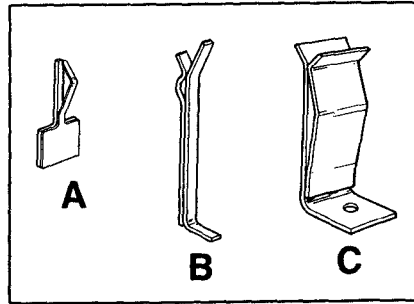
Push on type racks load "one-handed". (A) For inside racking. (B) For outside racking. (C) For flat sheeting racking.
